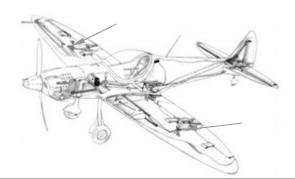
Fuel tank with fixed and soldered copper tape
